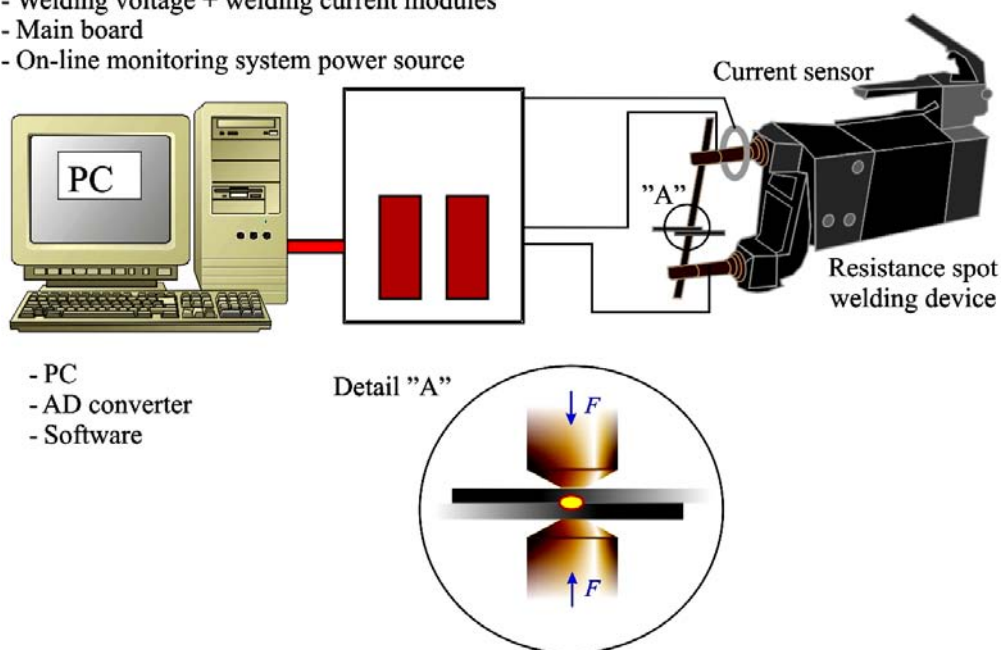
Schematic process for resistance spot welding and expected temperatures during welding [14]
